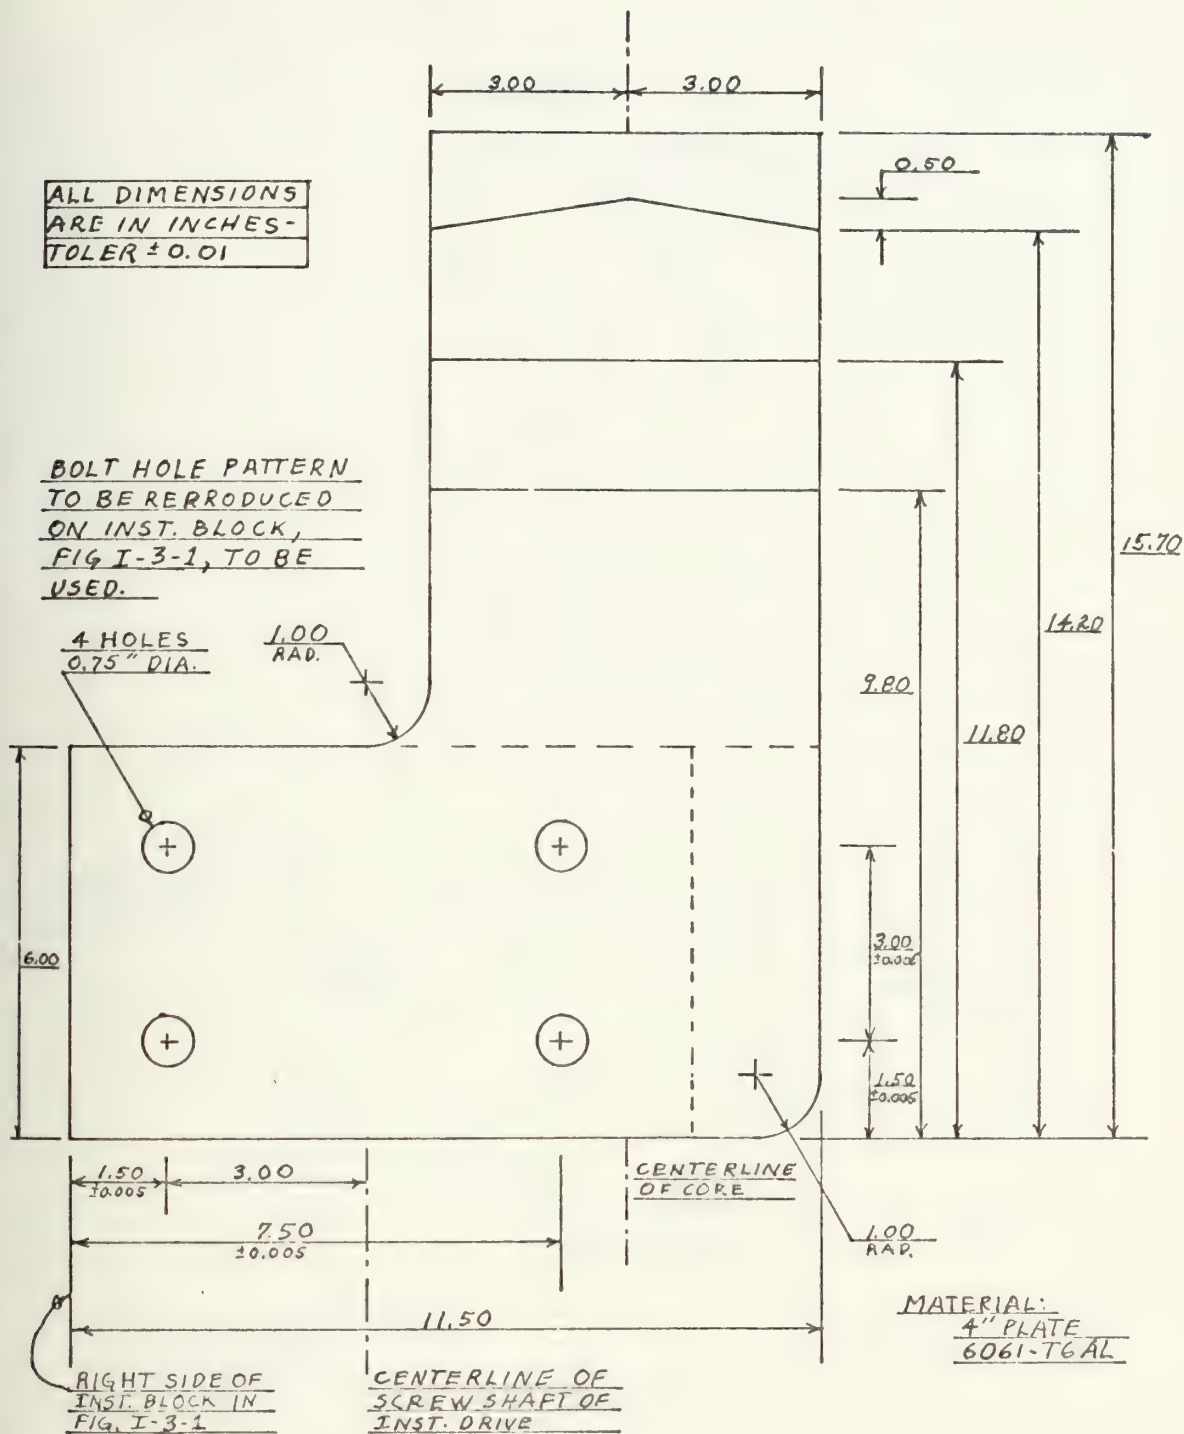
PIECE III-4-1, INSTRUMENT DRIVE -
